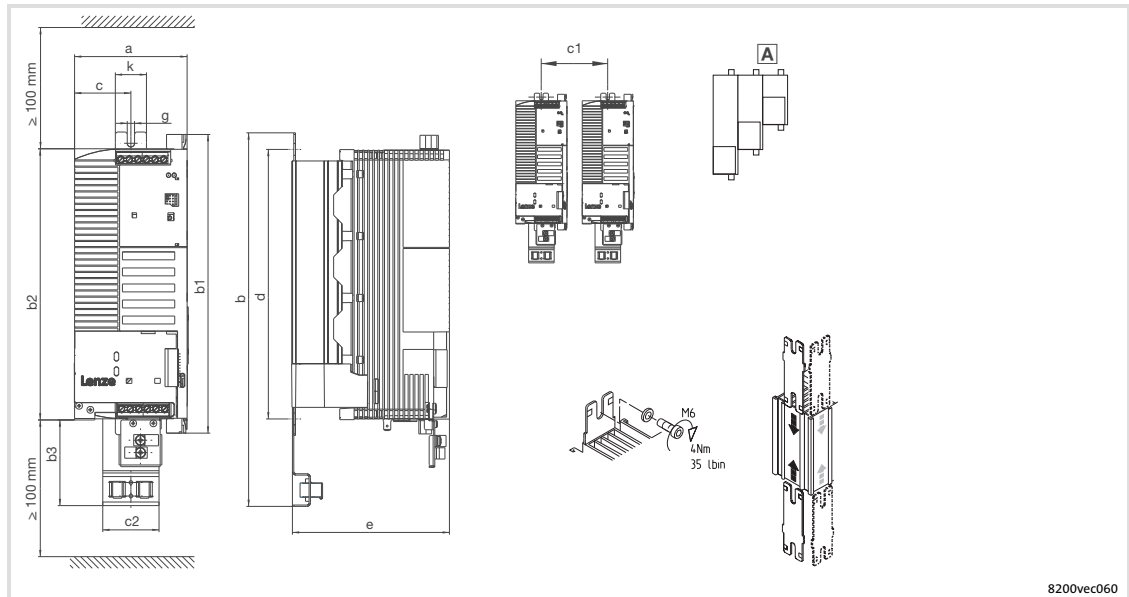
Standard installation with fixing rails 3 ... 11 kW
